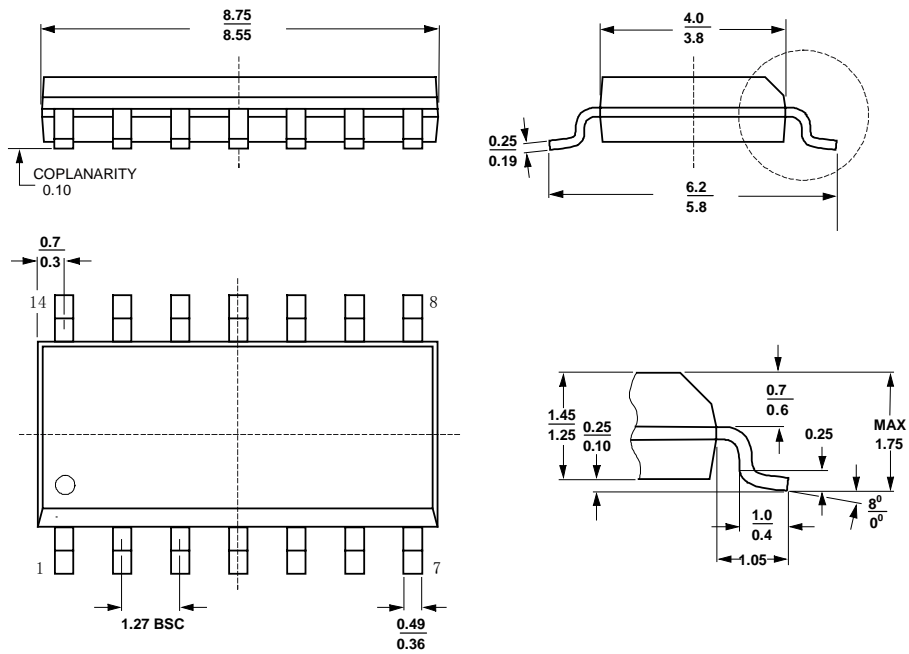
14-Lead SOIC Package Dimensions shown in millimeters
